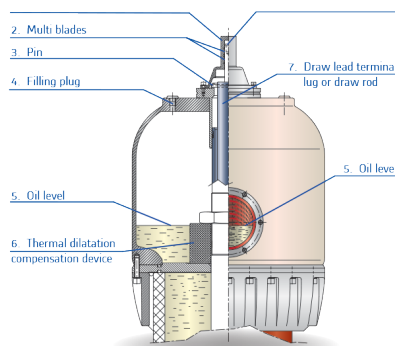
H5 head type (Draw lead or draw rod 550 kV)
